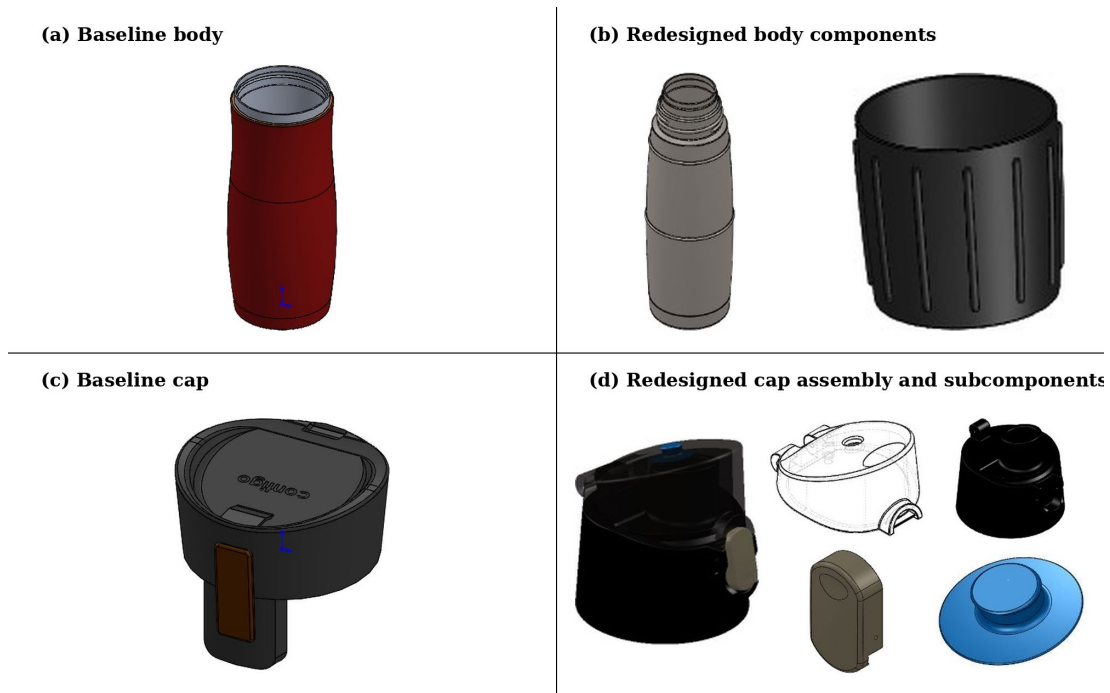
CAD architecture used in the redesign: (a) baseline body, (b) redesigned body components, (c) baseline cap, and (d) redesigned cap assembly and subcomponents.
